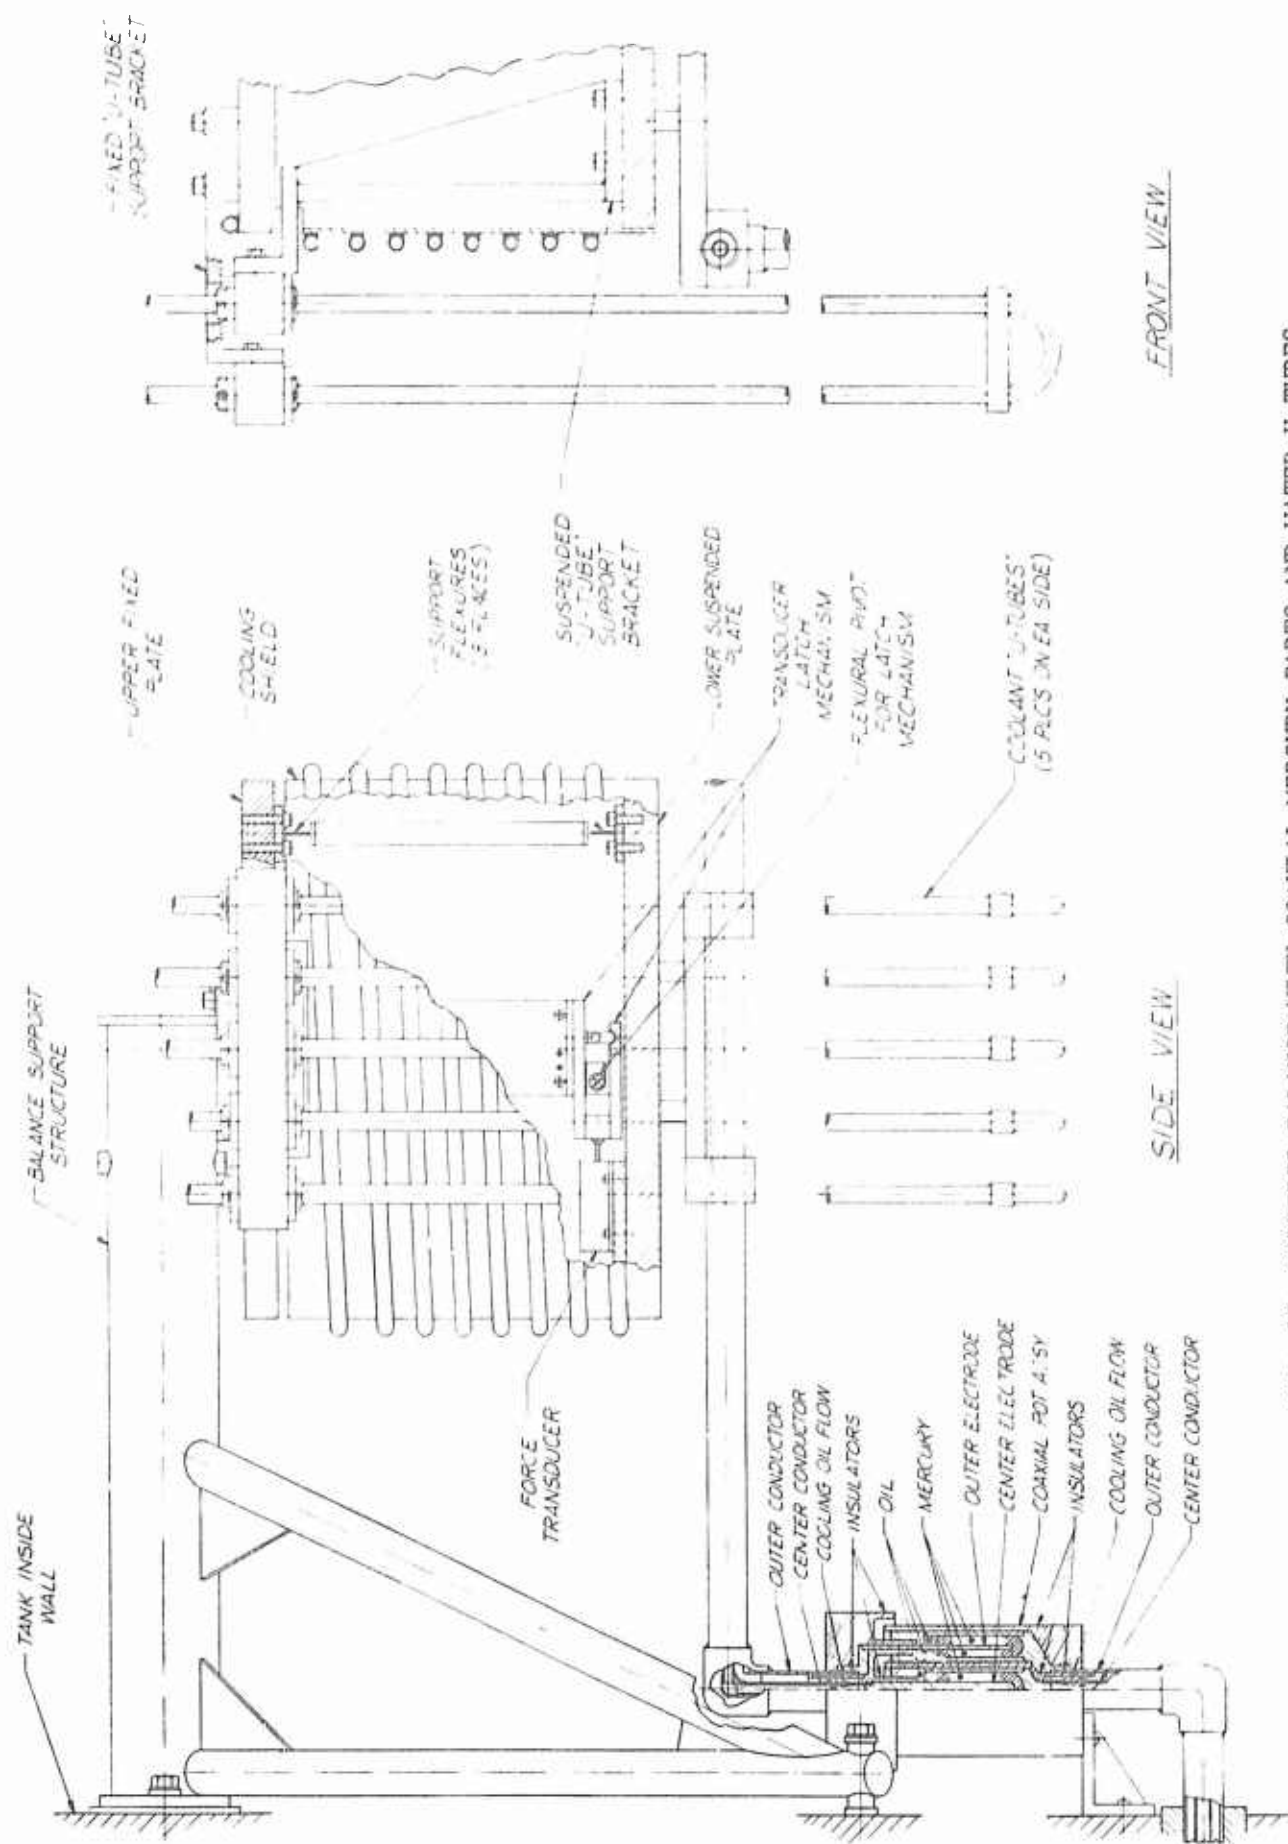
MODIFIED BALANCE WITH COAXIAL MERCURY PARTS AND WATER U-TUBES
